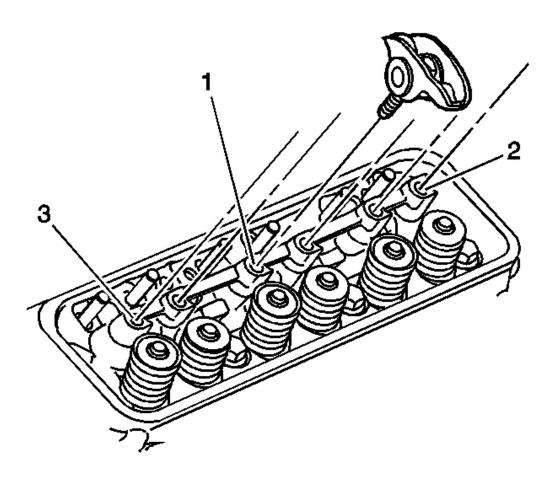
Valve Rocker Arm Assemblies Courtesy of GENERAL MOTORS CORP.
